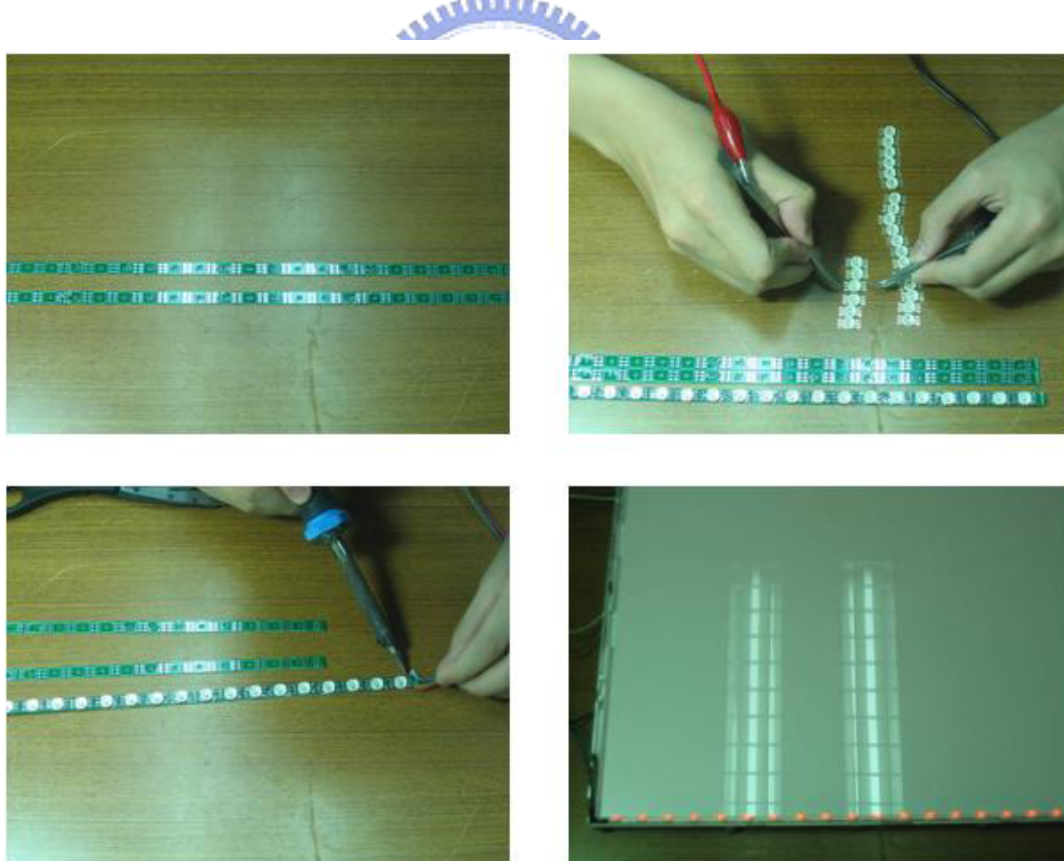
The bare PCBs of LED light-bar (top-left), LED testing (top-right), soldering process (bottom-left), and after assembling and emitting red light (bottom-right).
